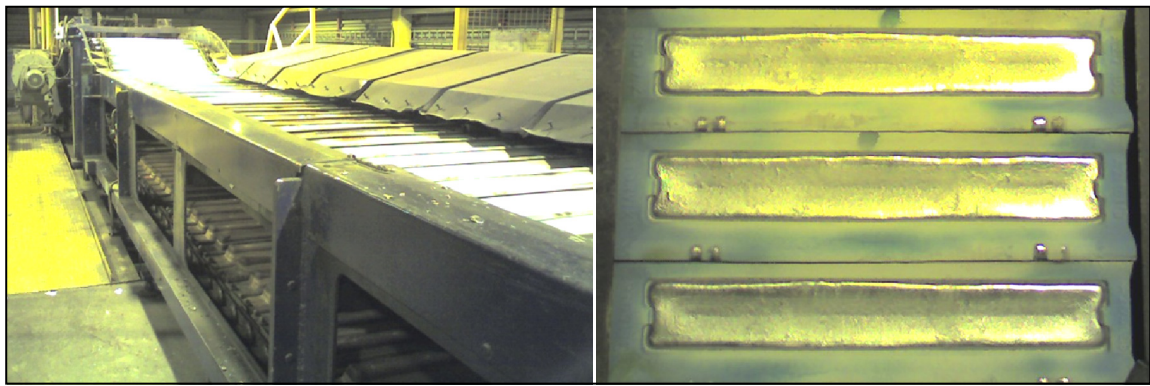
Side view of casting ingot machine (left) and top view of filled casting moulds (right).
